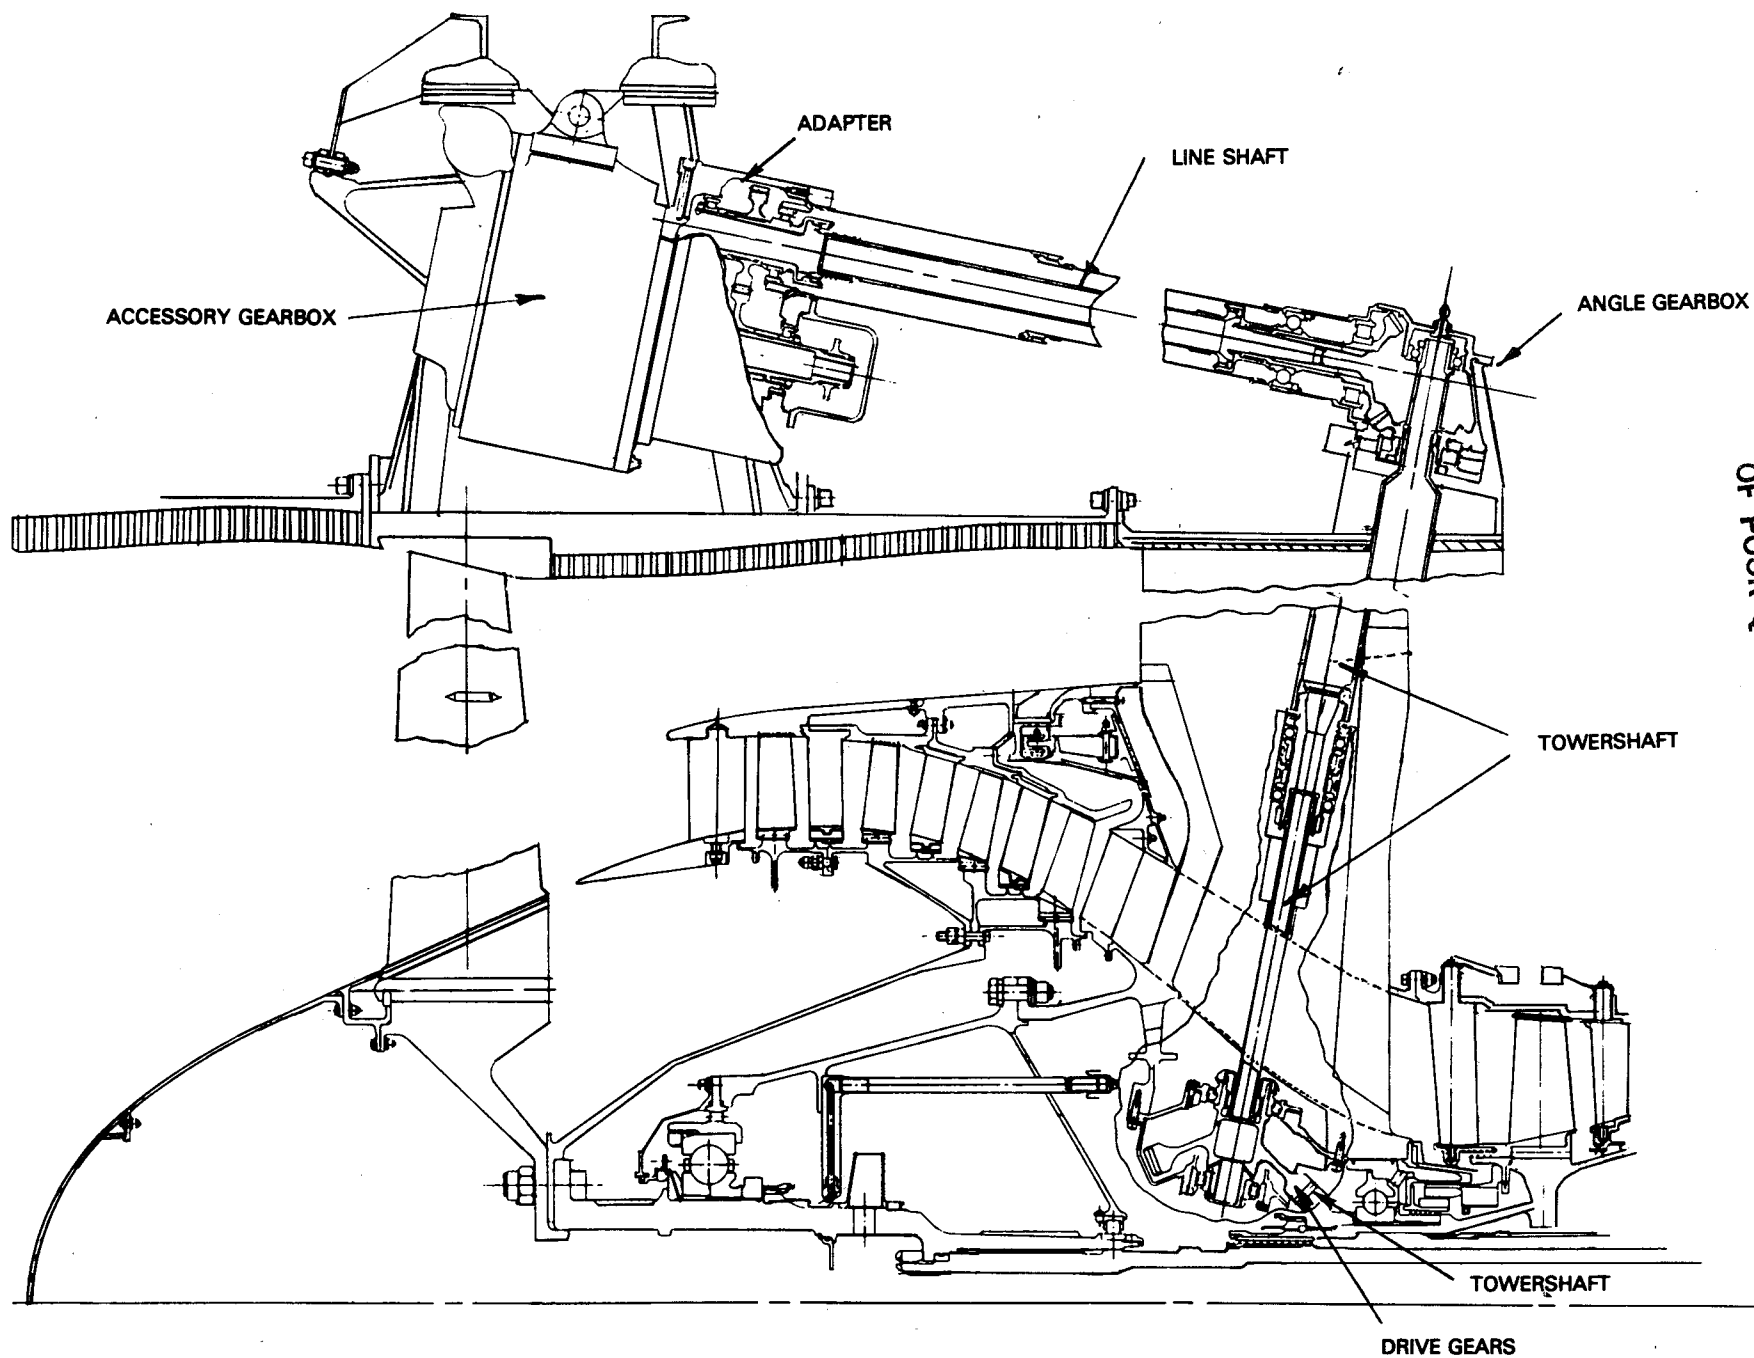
Integrated Core/Low Spool Gearbox Configuration and Mounting System
